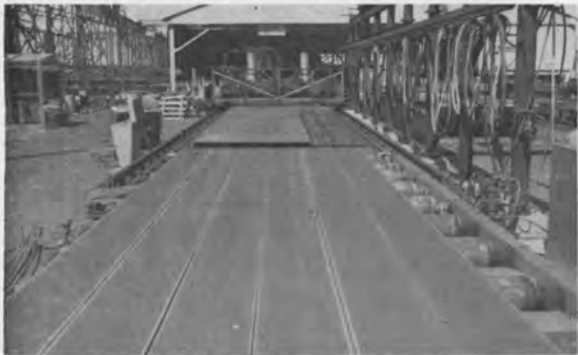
Flame planer performs edge preparation or cuts plates into flanges and webs for beam welder.
